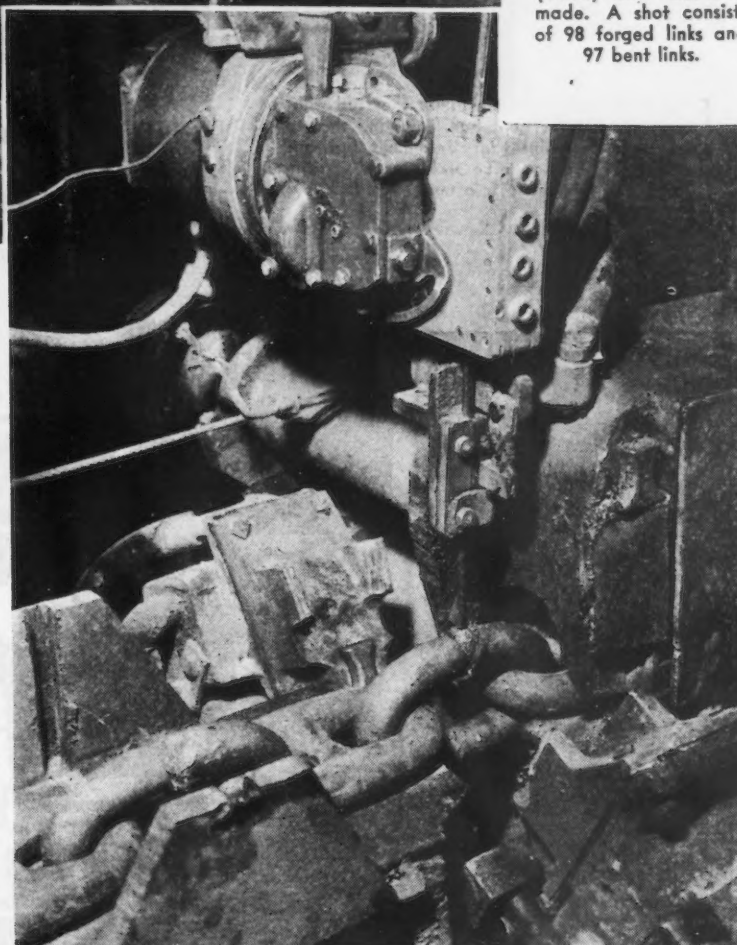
As the formed chain is fed from the spools to the battery of Unionmelt welding machines a small wad of steel wool is inserted in the opening in the links to provide the electrical contact for starting the welding operation. Reels of 5/16 in. welding wire and the welding transformers are located in a balcony above the welding stations. The transformers deliver 1600 amp. at 35 volts to each head.
